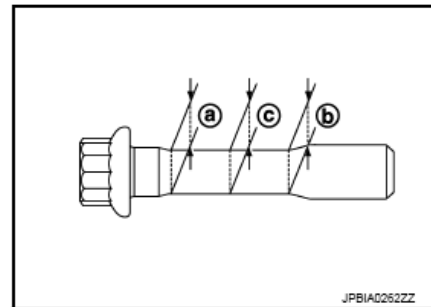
Identifying Connecting Rod Bolt Outer Diameter
